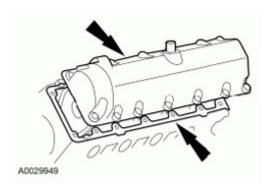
Applying Silicone Gasket And Sealant To Valve Cover Gasket Surface Courtesy of FORD MOTOR CO.
